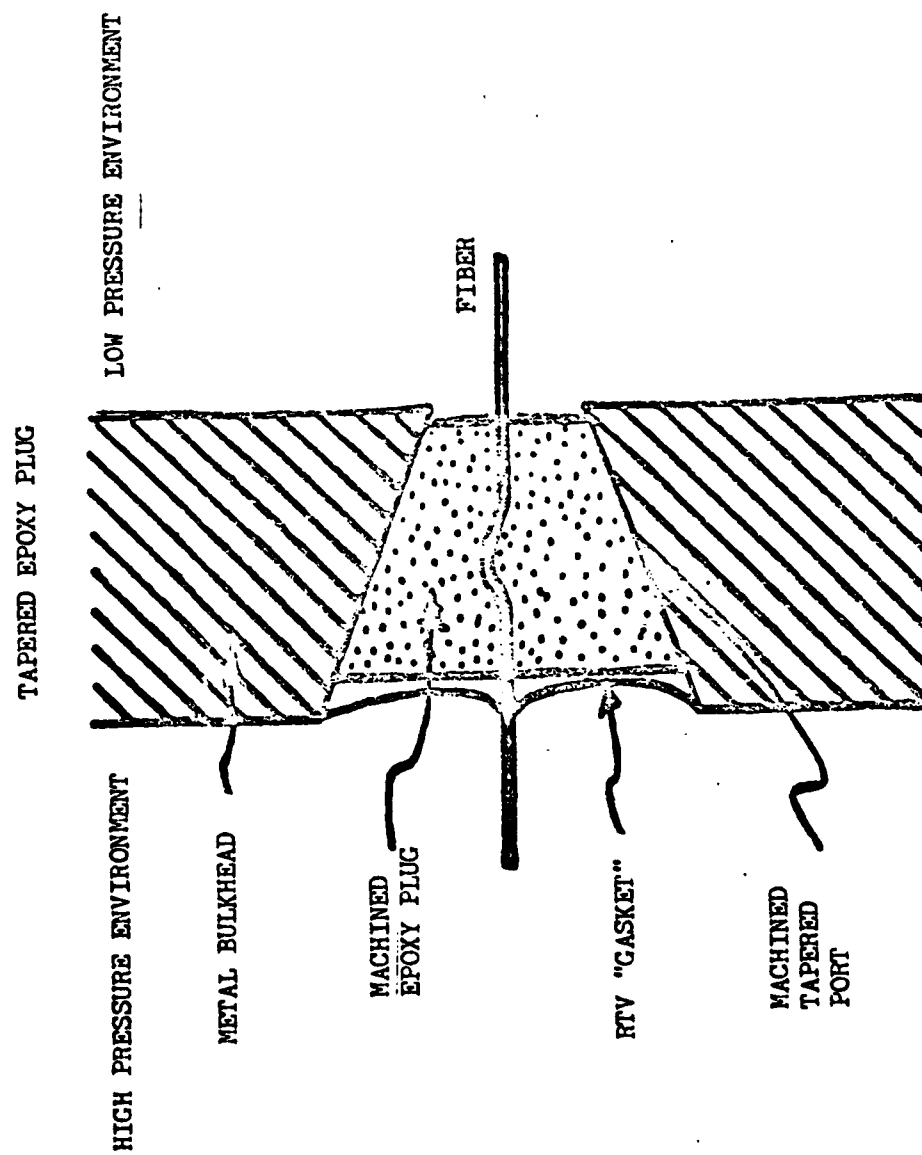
Tapered Epoxy Plug Bulkhead Penetrator
